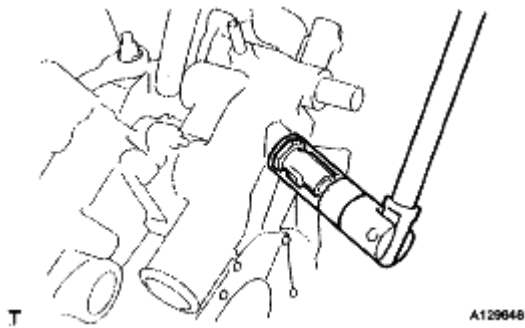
Identifying EFI Engine Coolant Temperature Sensor
